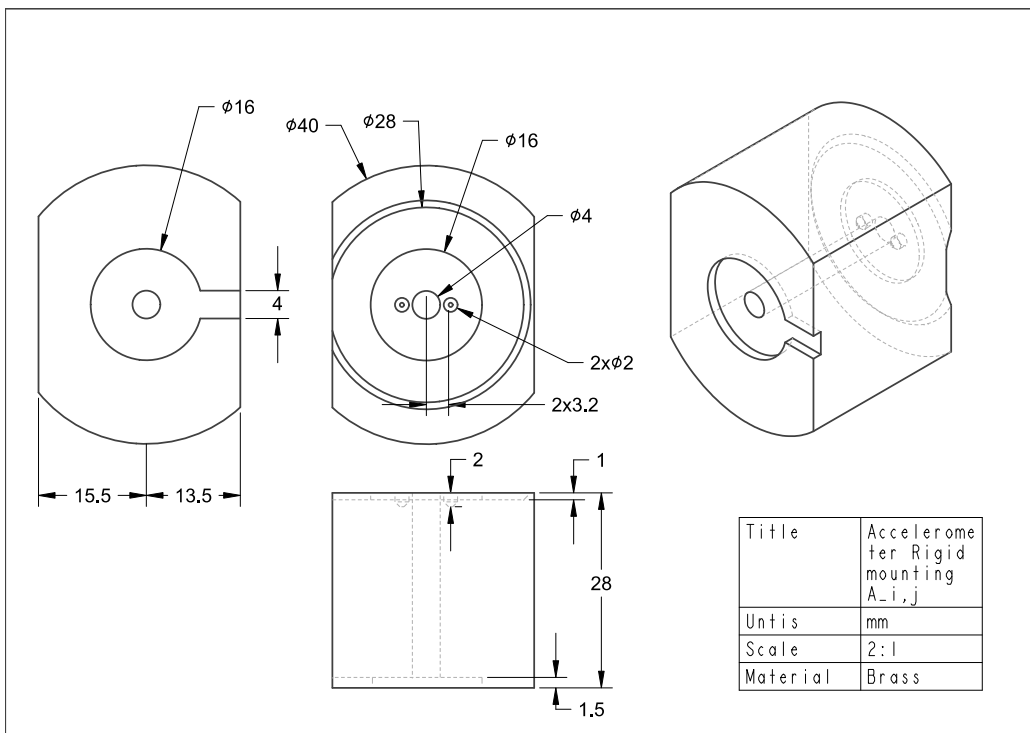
Technical drawing of Rigid Mounting Solution for  $\mathcal{A}_{i,j}$  with accelerometer.
